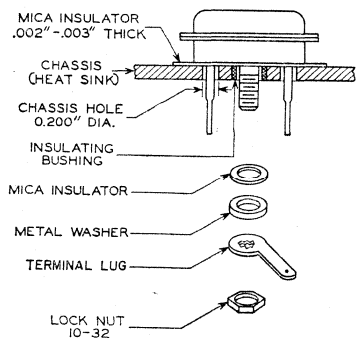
Suggested mounting arrangement for transistor on heat sink.
